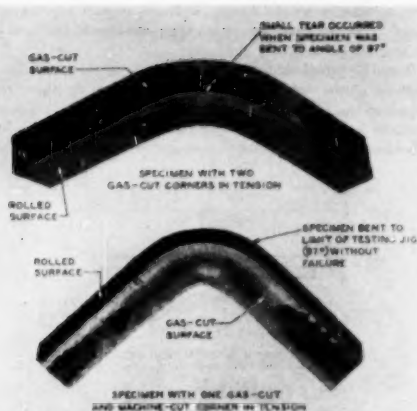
TYPICAL GAS-CUT BEND SPECIMENS OF 1-IN. QUENCHED-AND-TEMPERED T-1 STEEL (Tested at -98°F .)
